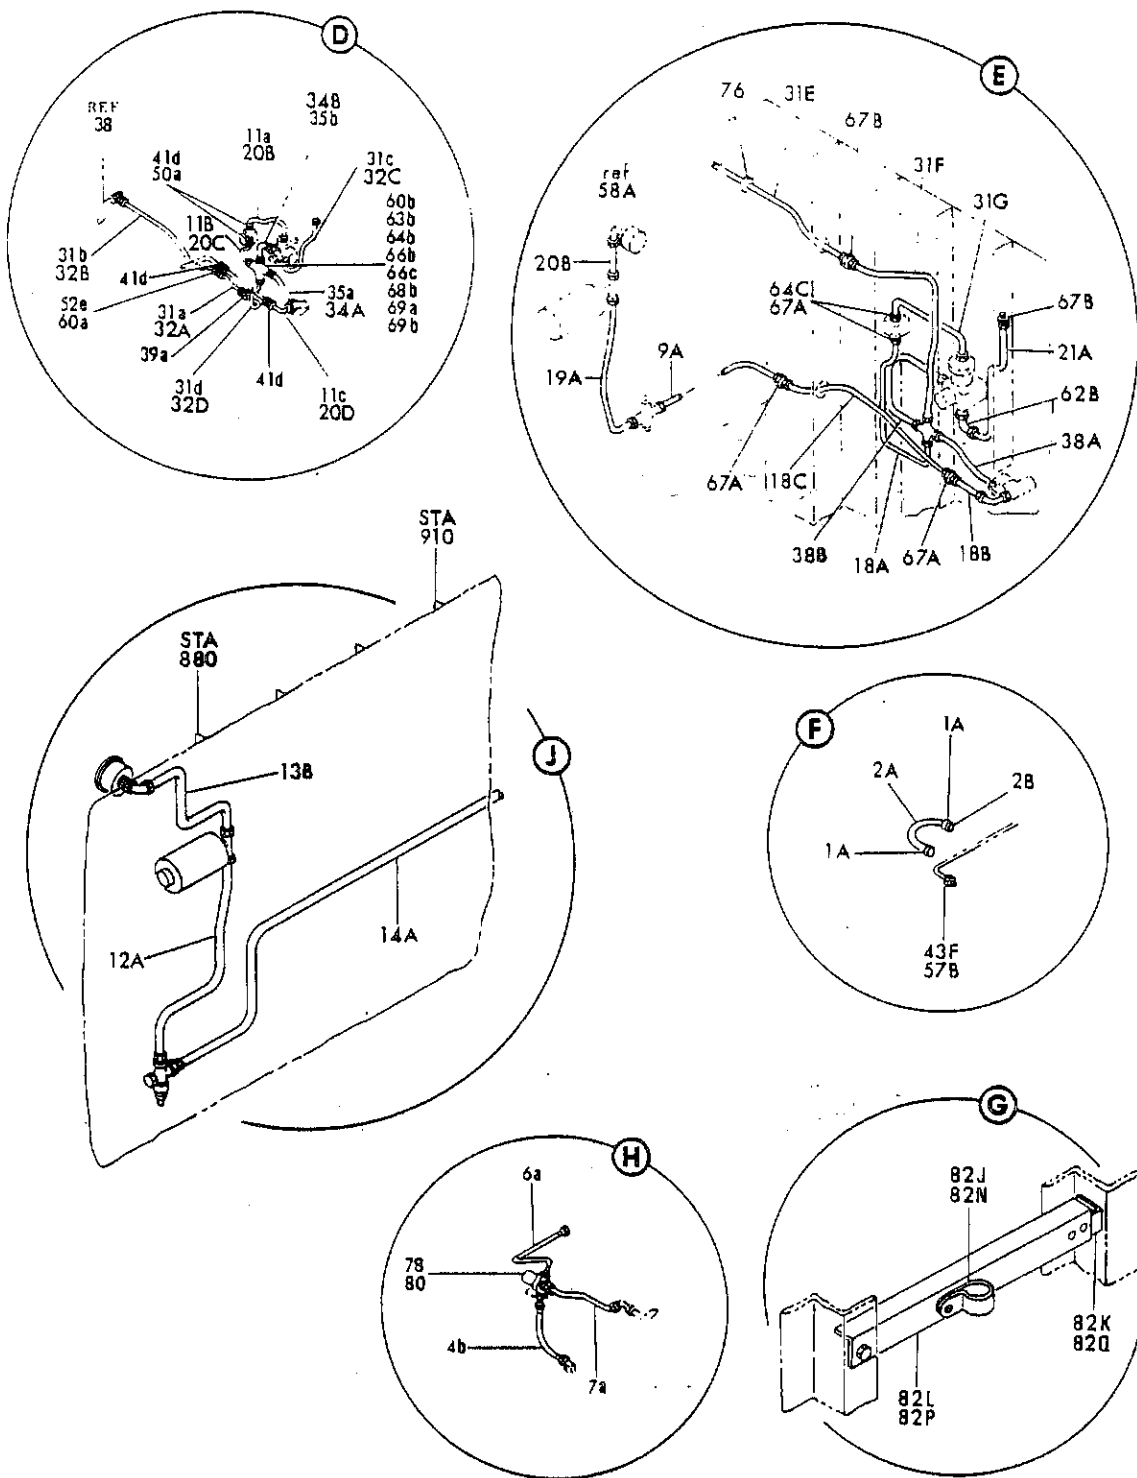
TUBING INSTL. BODY SECTION 54 STARTER COMPRESSOR (SHEET 2)
